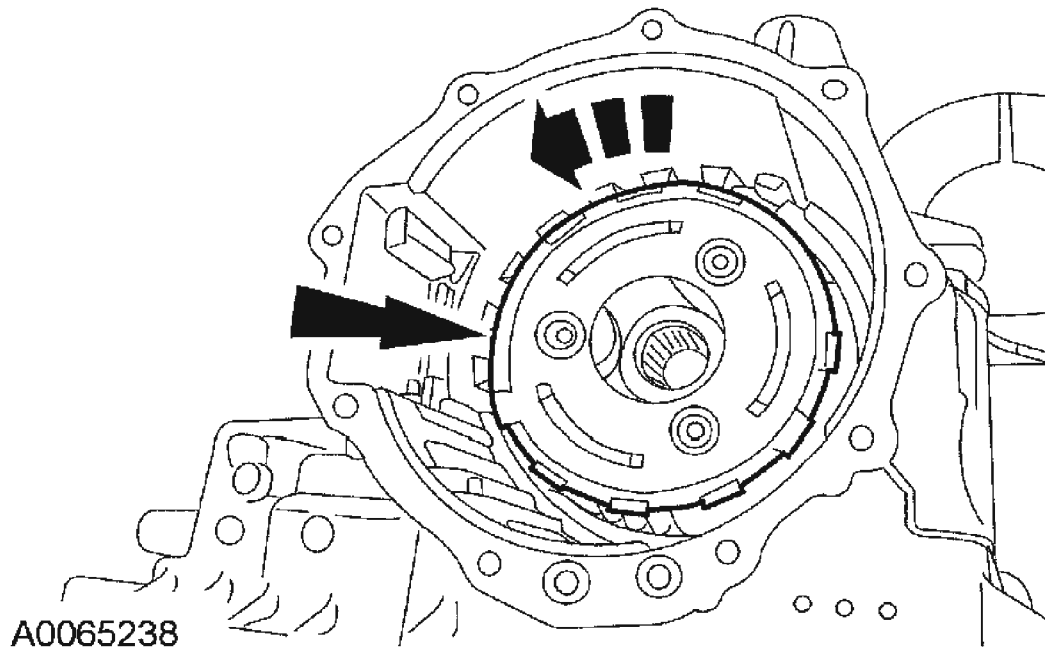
Identifying One Way Clutch Is Correctly Installed
